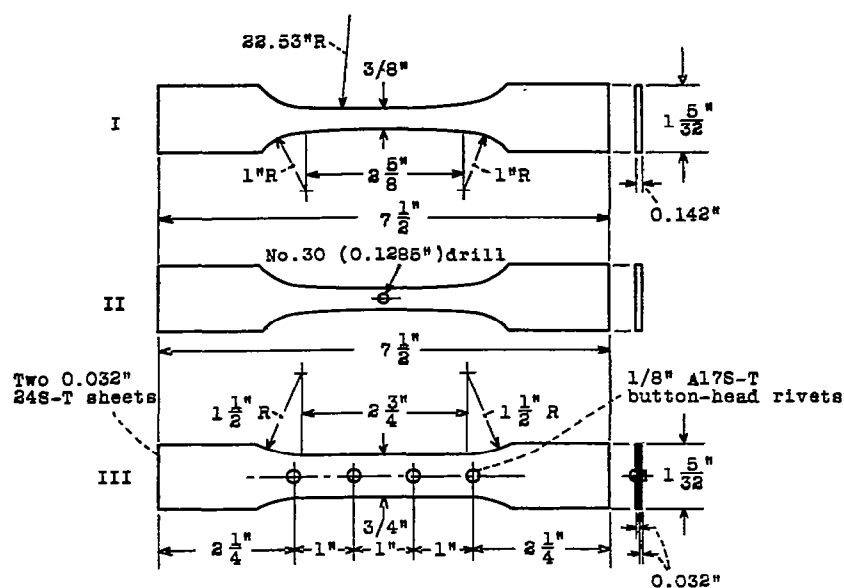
Coupon specimens I and II machined from the wing-beam flanges and idle-rivet specimen III.
